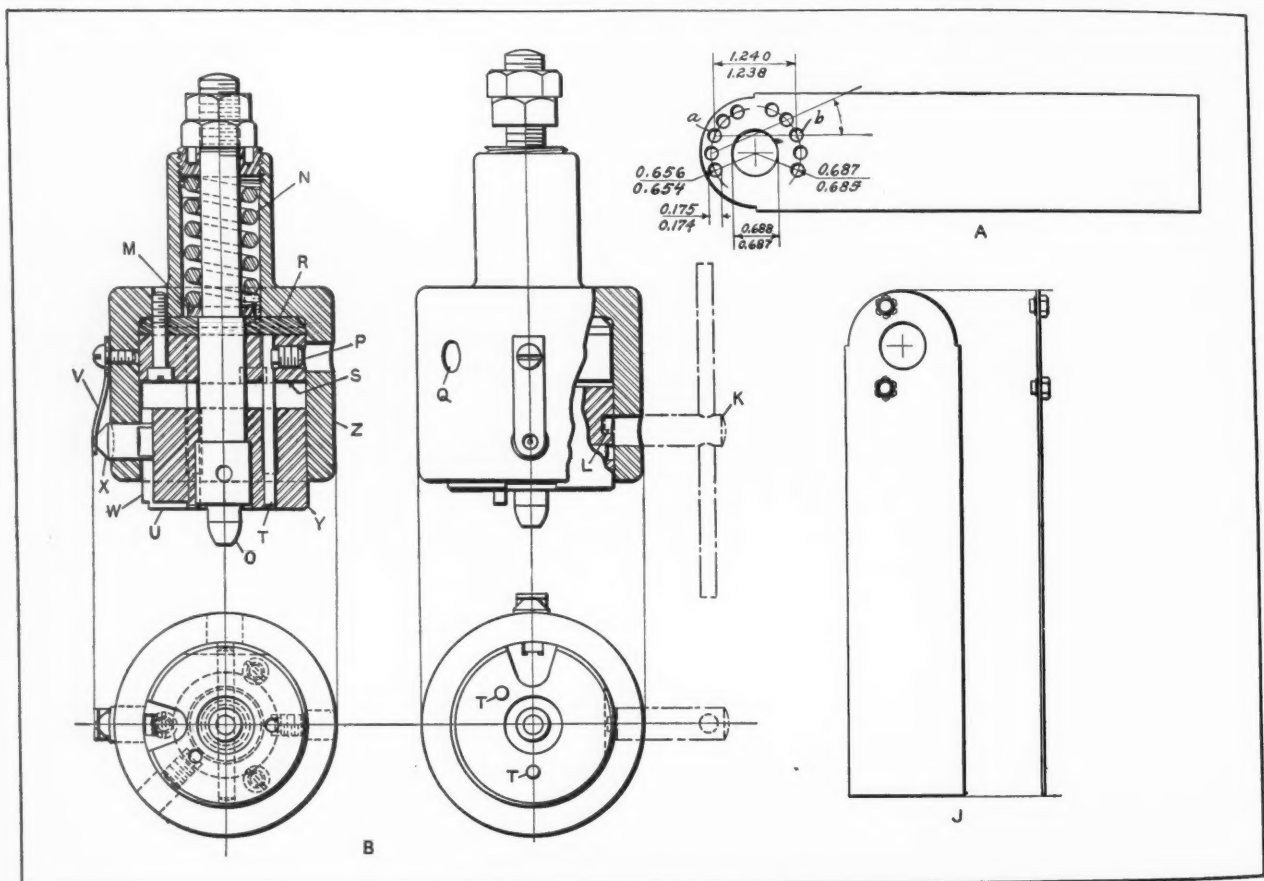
Punch Member of Indexing Die for Piercing Holes in Part A
